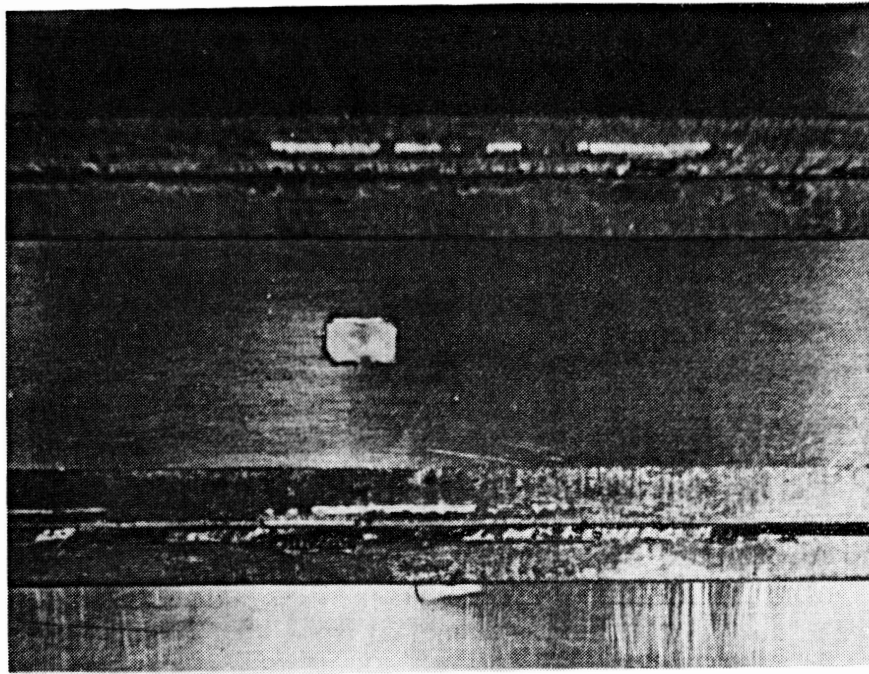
Close-Up View Showing Adhesive Blocked Slot Ducts
